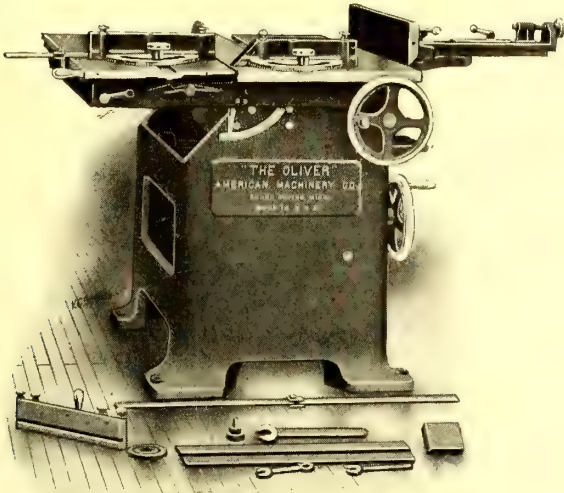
COMPLETE UNIVERSAL SAW BENCH
